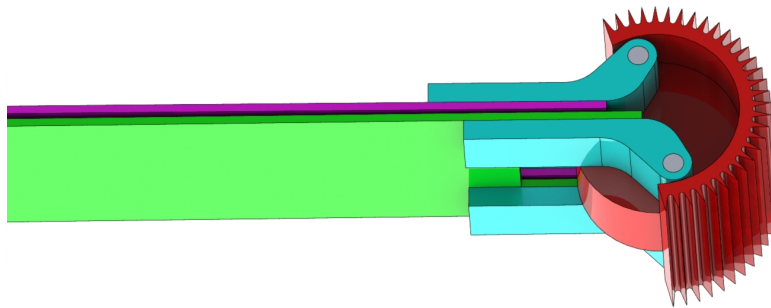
A design change proposed for improving the reliability of the drill is to create a hinged connection between the drill head and the leaf springs. The leaf springs are pink and green. The hinges are blue and the drill head is marked red.
